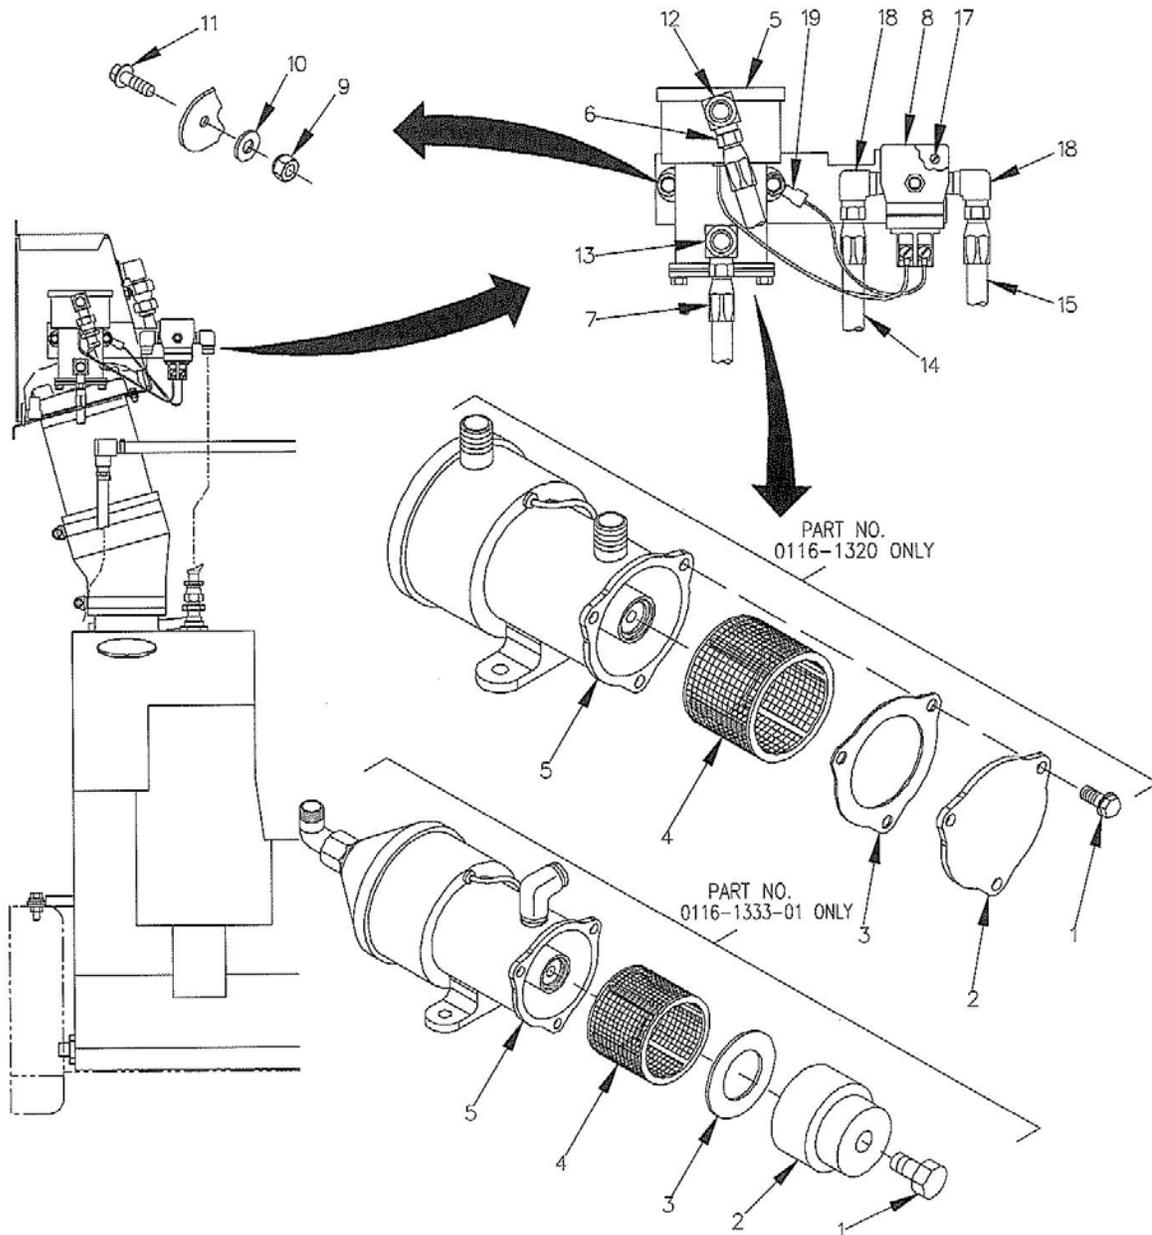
Main Fuel Pump and Auxiliary Fuel Pump Assembly with Solenoid Valve.
